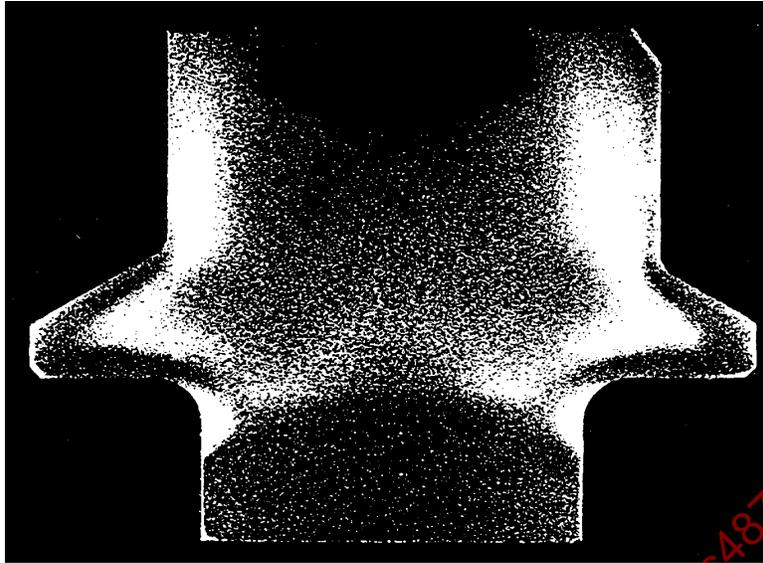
B - Head-to-shank section through finished part (shows evidence that head was formed by forging)
